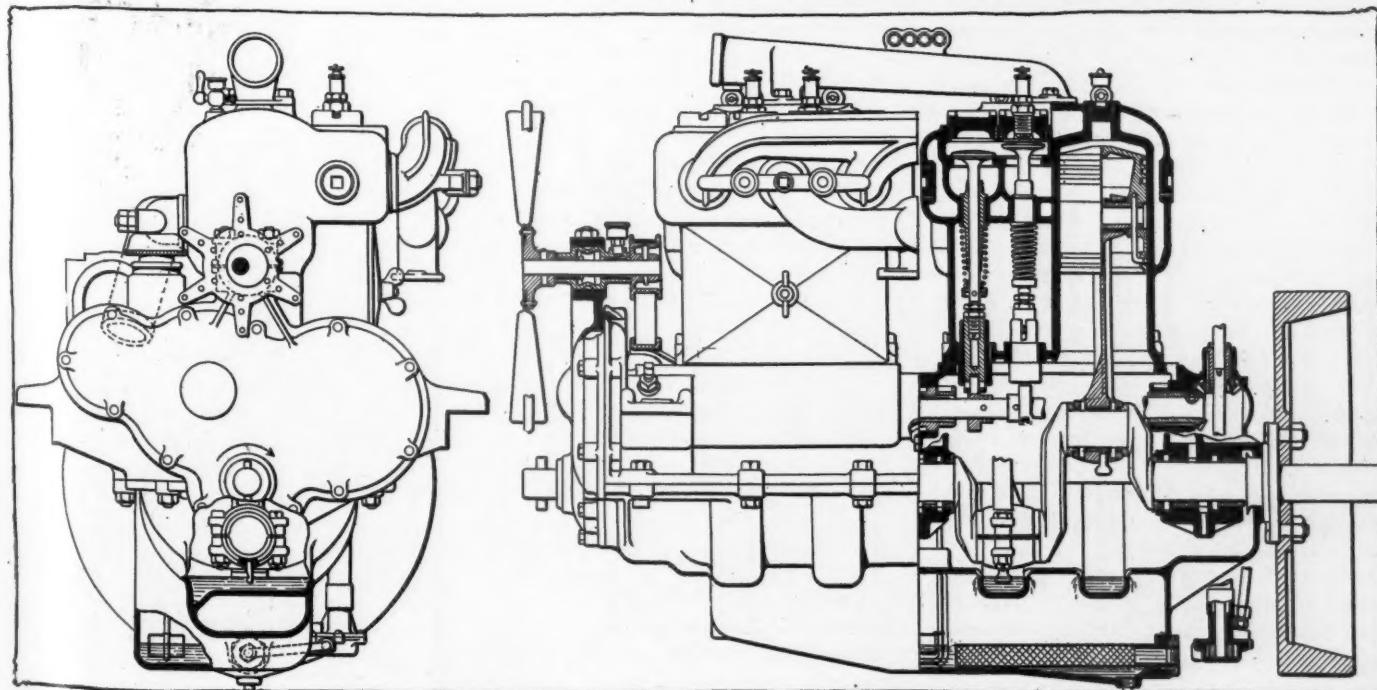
END AND SIDE SECTIONAL VIEWS OF A BEAVER ENGINE
